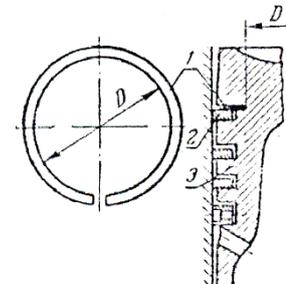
Scheme of restoration of the coupling ring-piston groove: 1 - clamping ring; 2 - piston ring; 3 - piston
